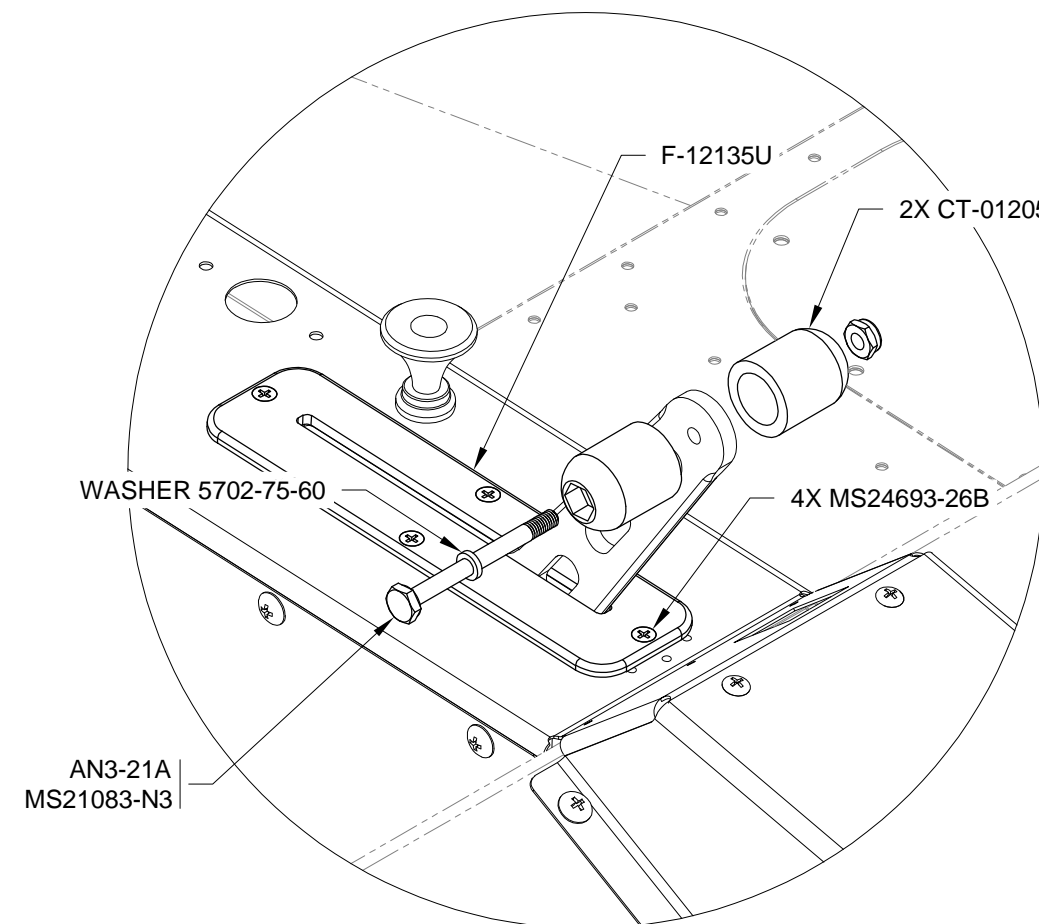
THROTTLE GUIDE & T-HANDLE
